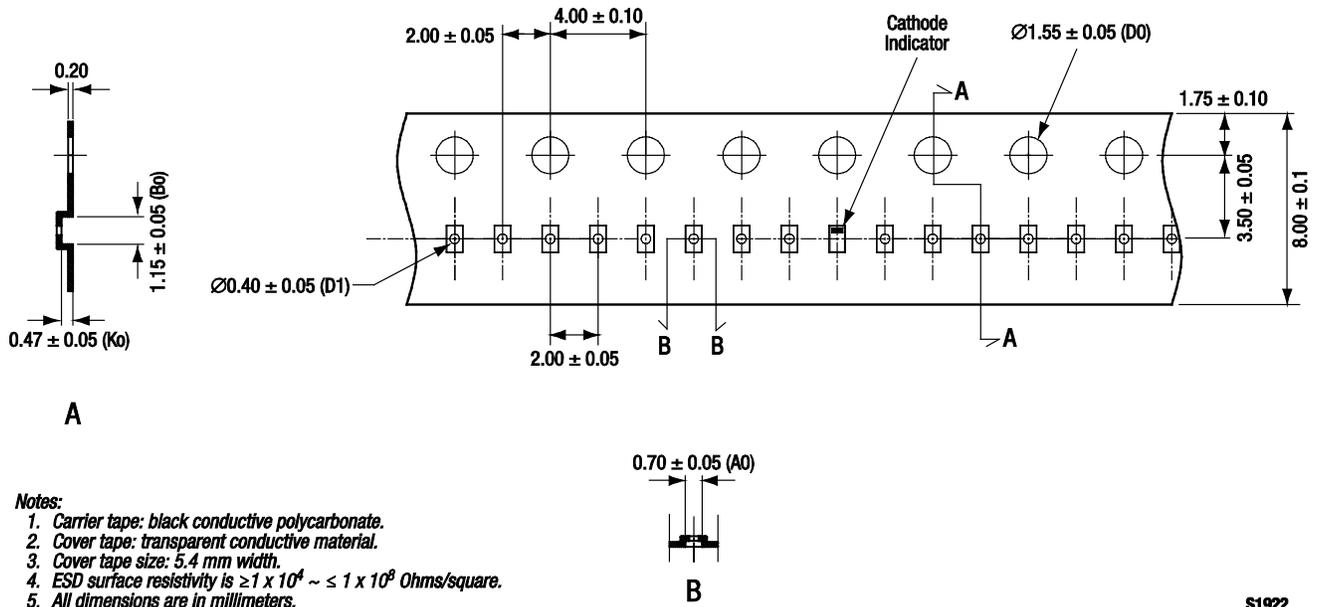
SMP1345-040LF Tape and Reel Dimensions
